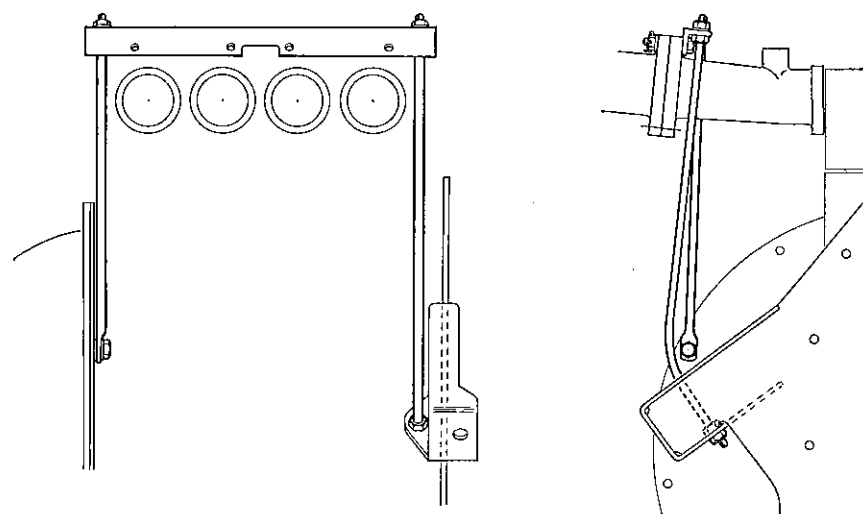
Method of supporting Weber carburetors (applicable to the first 100 sets only)
